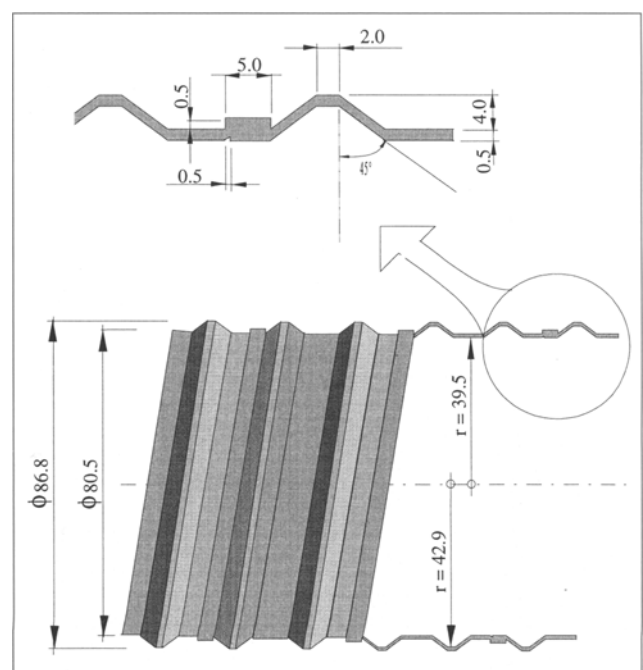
Studied strand tube and its dimensions (measures in mm).
